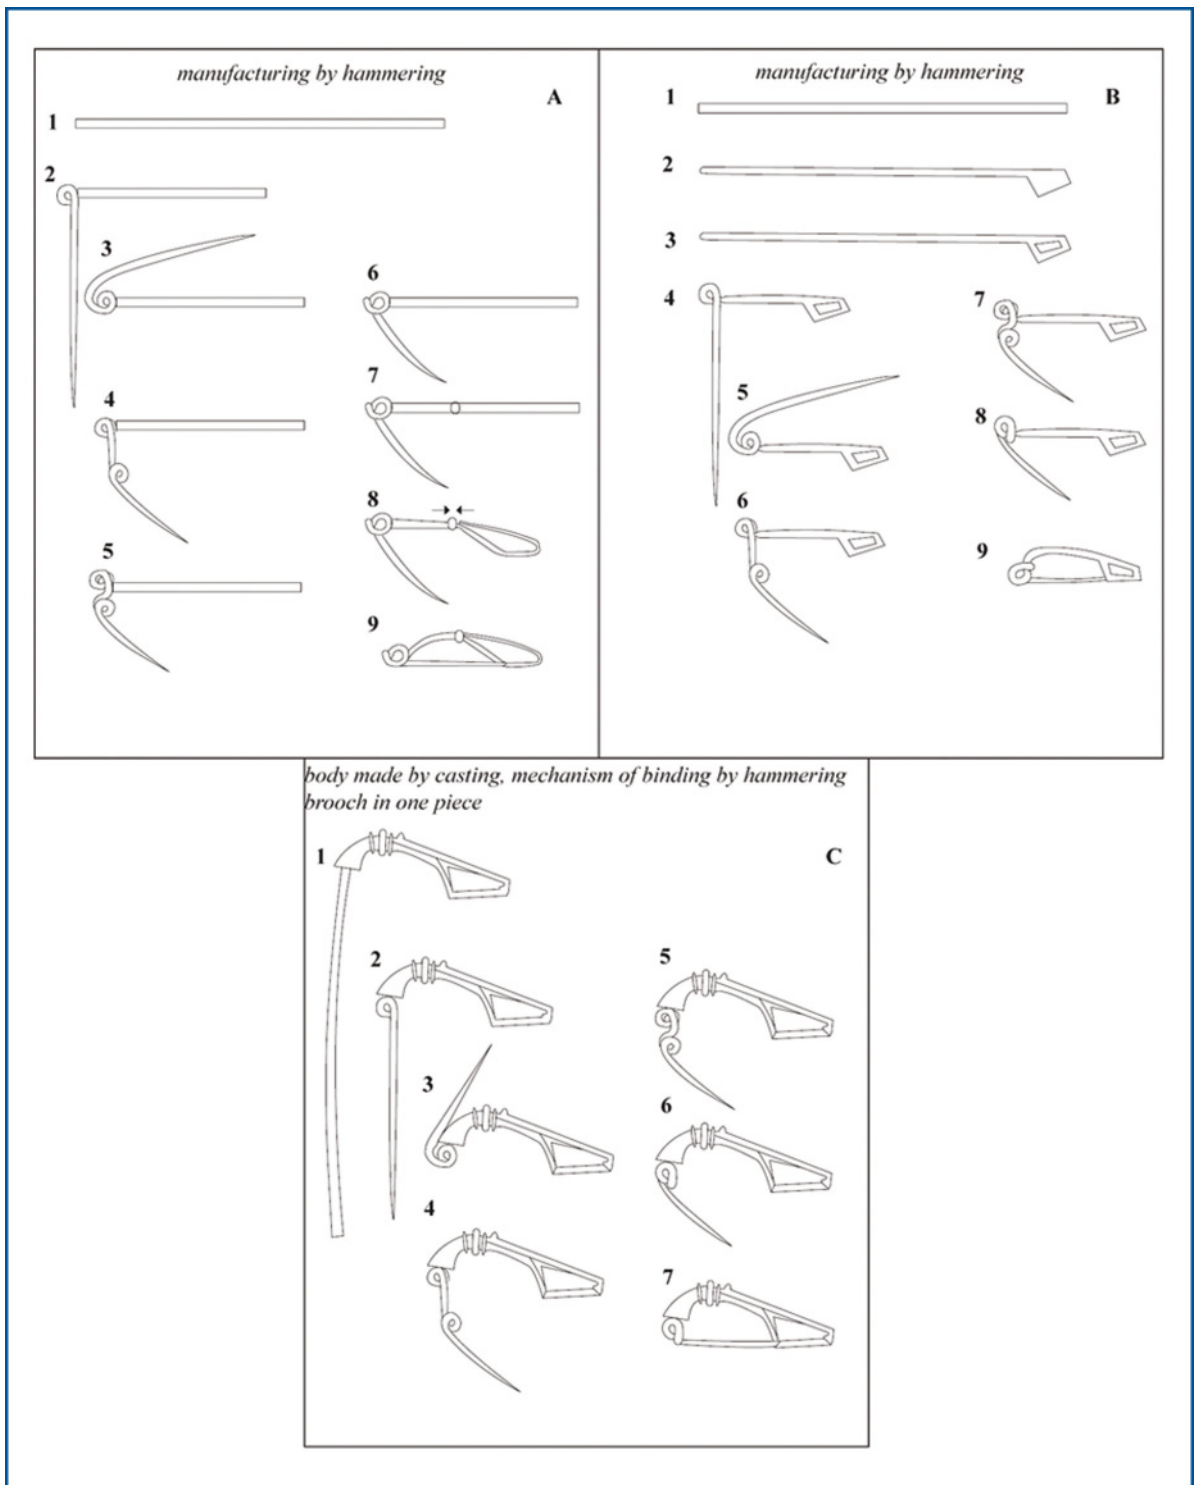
Proposal of schematic restoration of different steps of manufacturing: A) brooches with foot attached on the bow, B) brooches with foot making body with the bow, C) brooches with body made by casting and mechanism of binding by hammering (in one piece).
